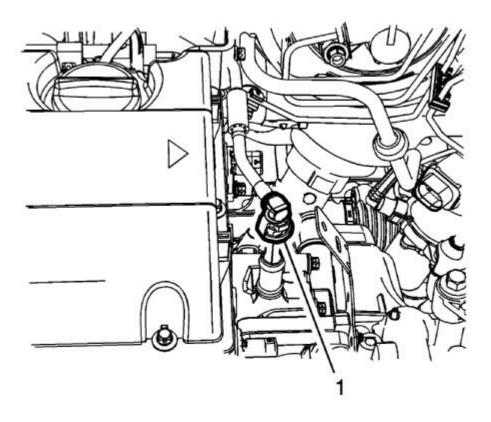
Throttle Body Heater Inlet Pipe Courtesy of GENERAL MOTORS COMPANY
